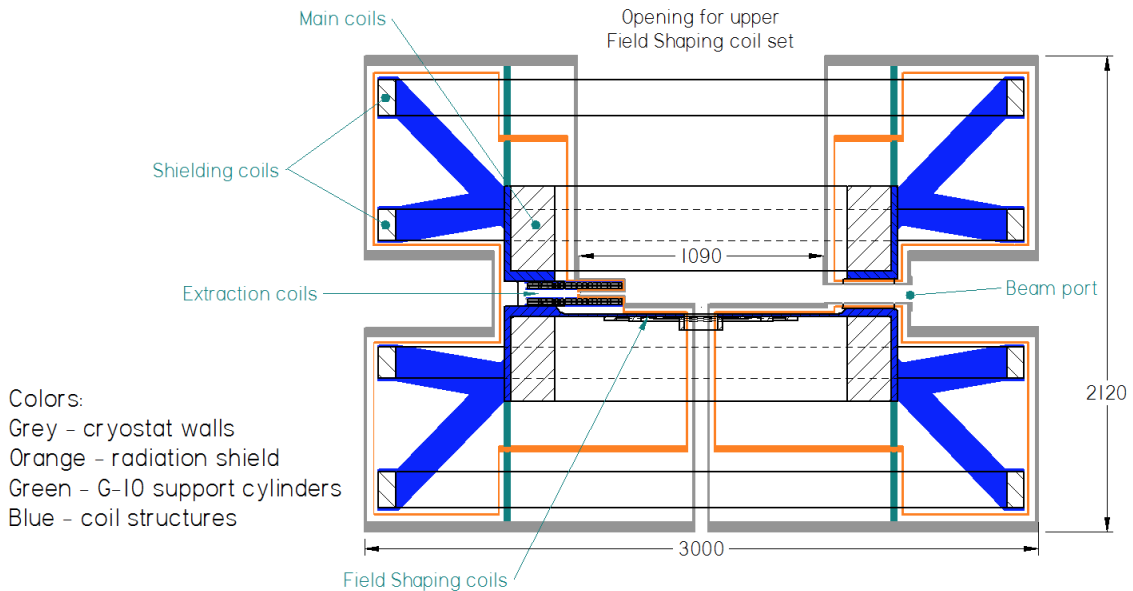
Section view of cyclotron cryostat with upper field shaping coils removed.
